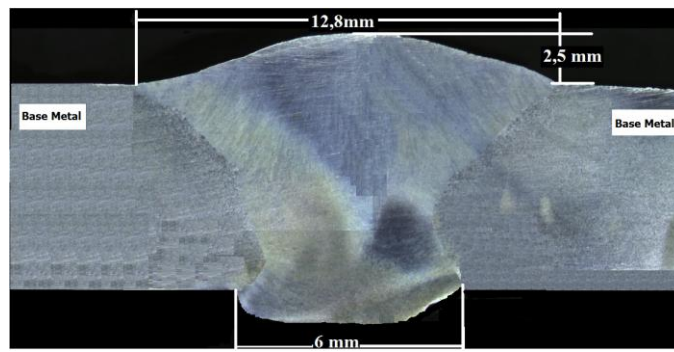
Representative macrostructure of the weld of Grade-A and dual-phase steel joints
